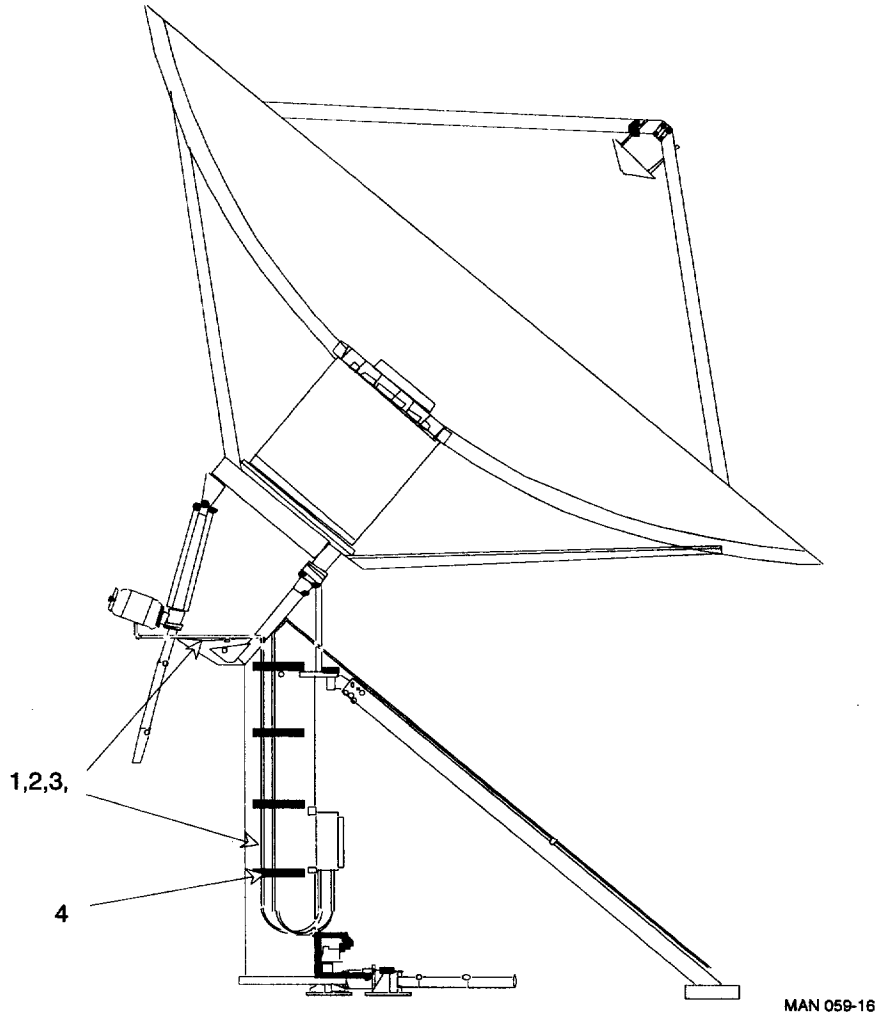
Elevation Motor Wiring, DC Powered Model 8861
